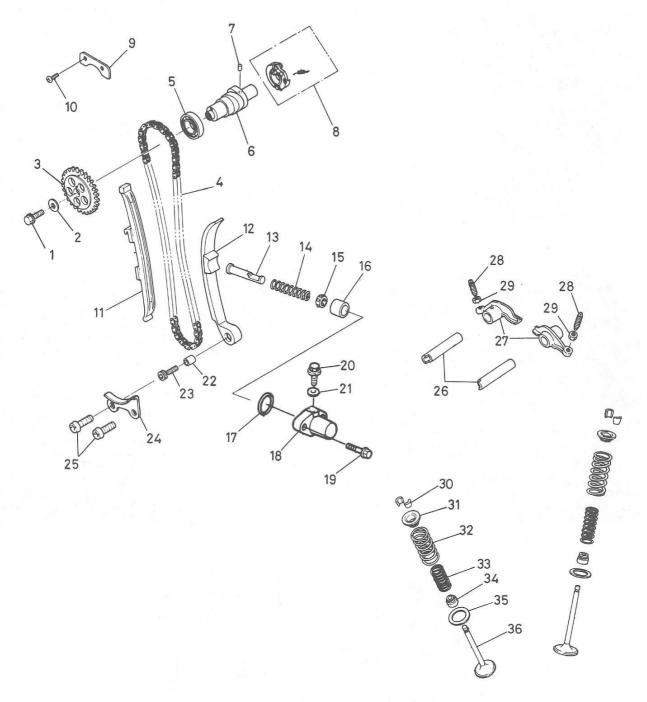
Valve gear and cam chain - typical (Sec 6)
